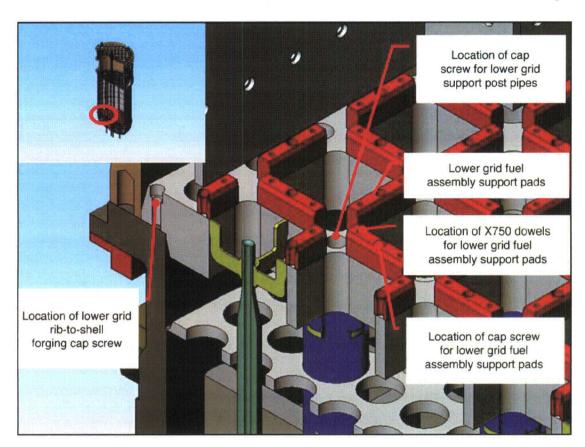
B&W Lower Grid Assembly Showing Fuel Assembly Support Pad Items
